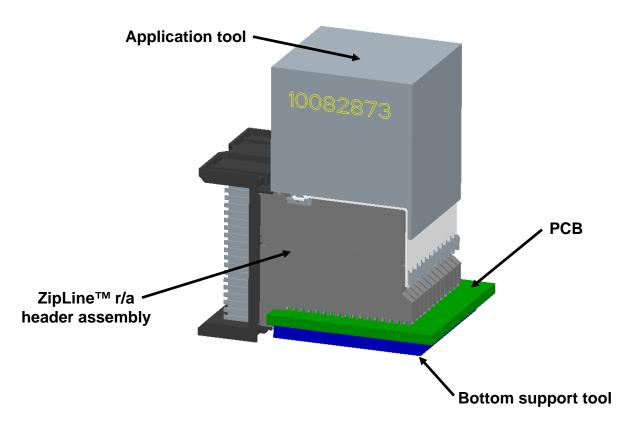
ZipLine[™] right angle header application tool (6pair, 12 IMLA shown)
